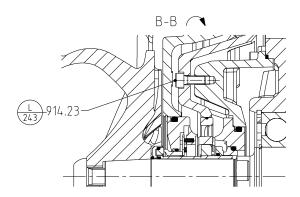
General assembly drawing of Amarex KRT, mechanical seal and impeller
